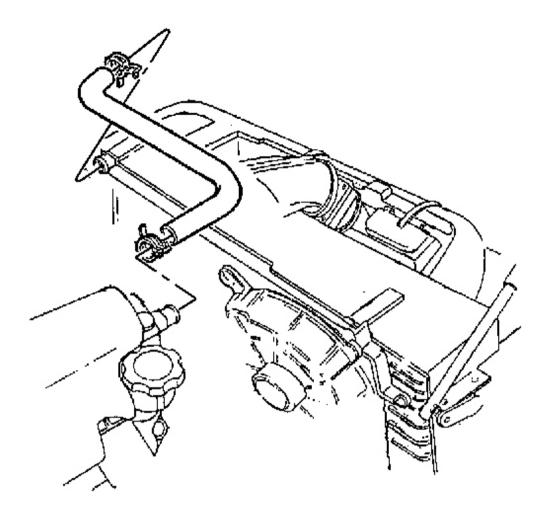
Radiator Inlet Hose & Radiator Inlet Courtesy of GENERAL MOTORS CORP.
